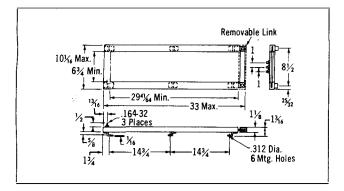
Mounting Dimension for S# 1255C39H03, H04
